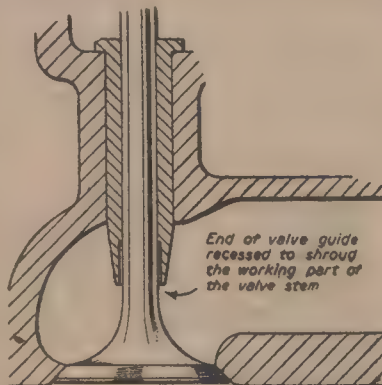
On some engine designs the valve guide is recessed. This shields the working stem of the valve from harmful deposits.
